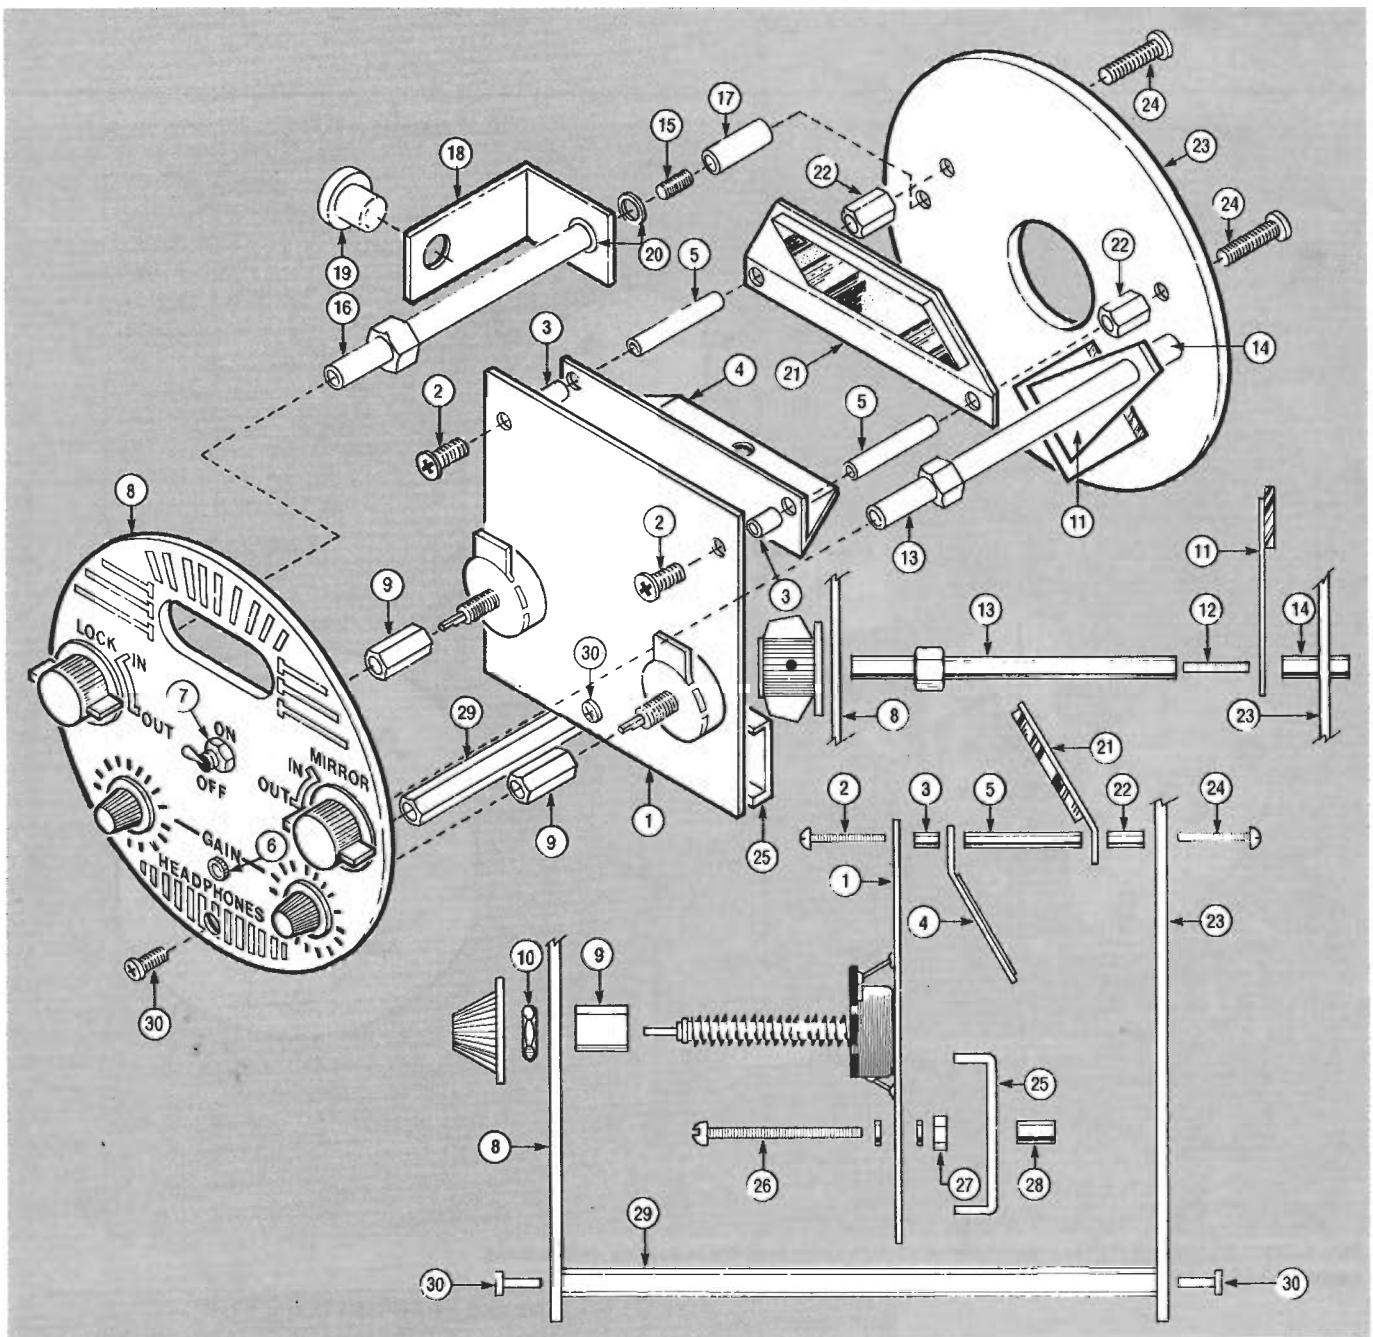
THE RECEIVER is a little more complicated than the transmitter. Identify all parts before assembling them.
